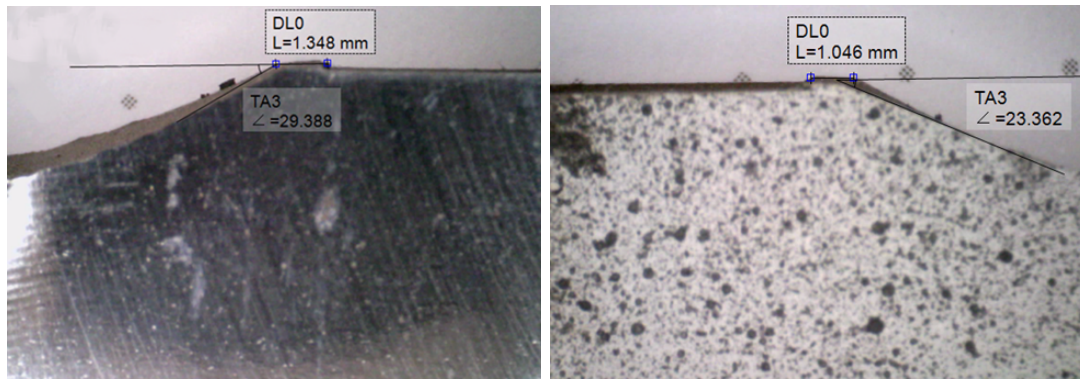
Macroview on the fracture surface of specimen tested for 30° (initial crack length – notch+precrack=20.675 mm /max 20.895)
